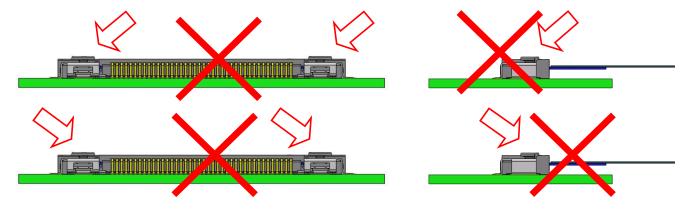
FFC/FPC withdrawing - Bad example 1
